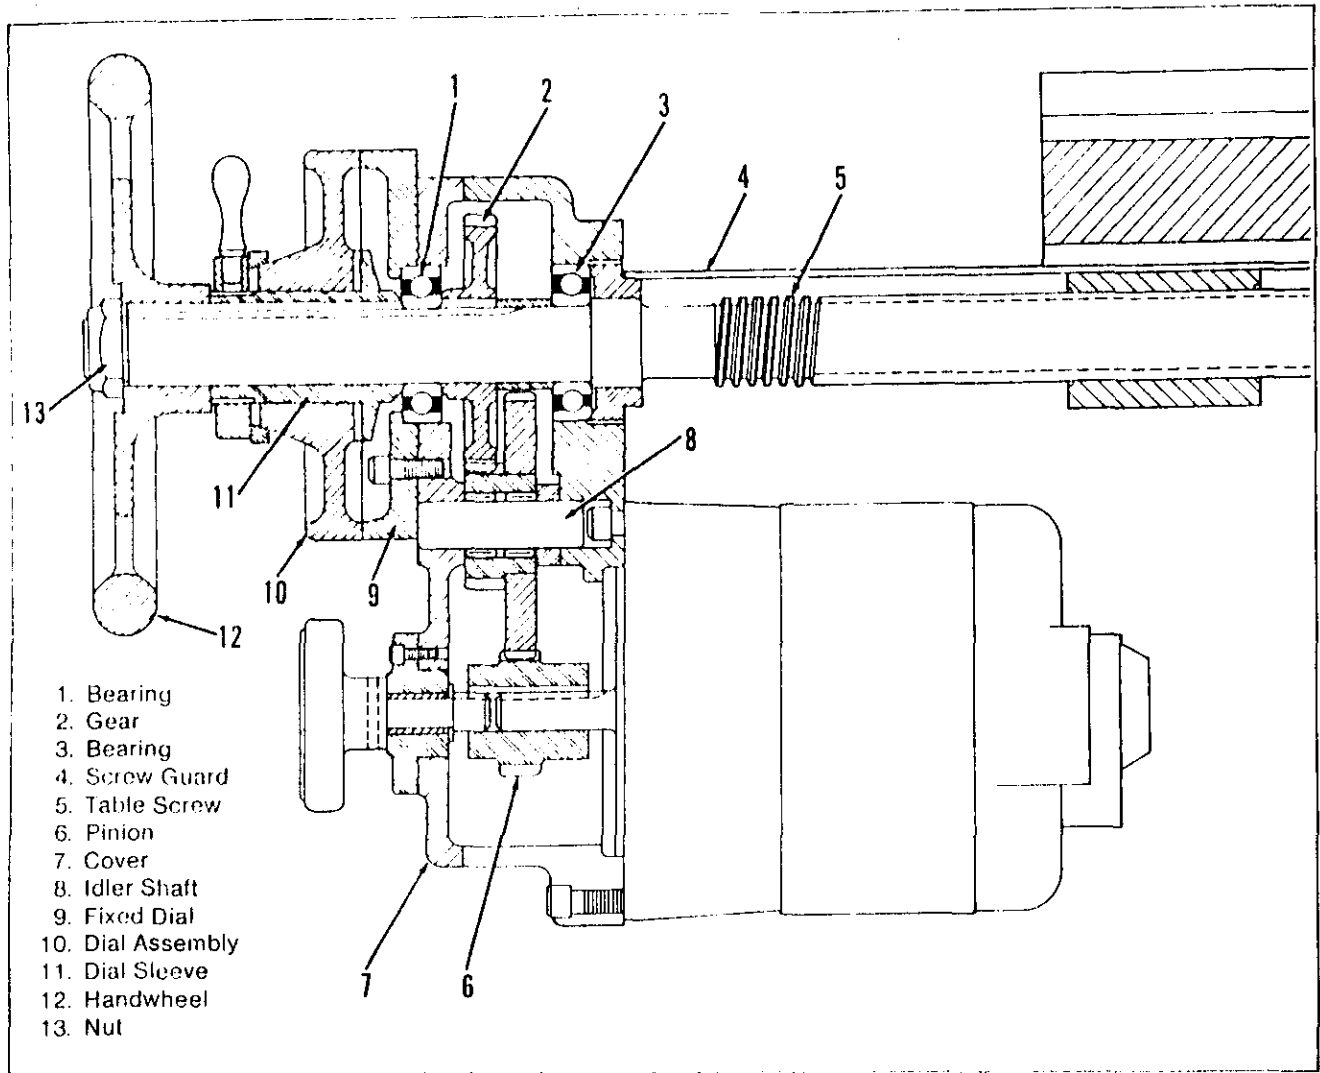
Feed Screw Assembly (With Acme Threads) For Table And Saddle
